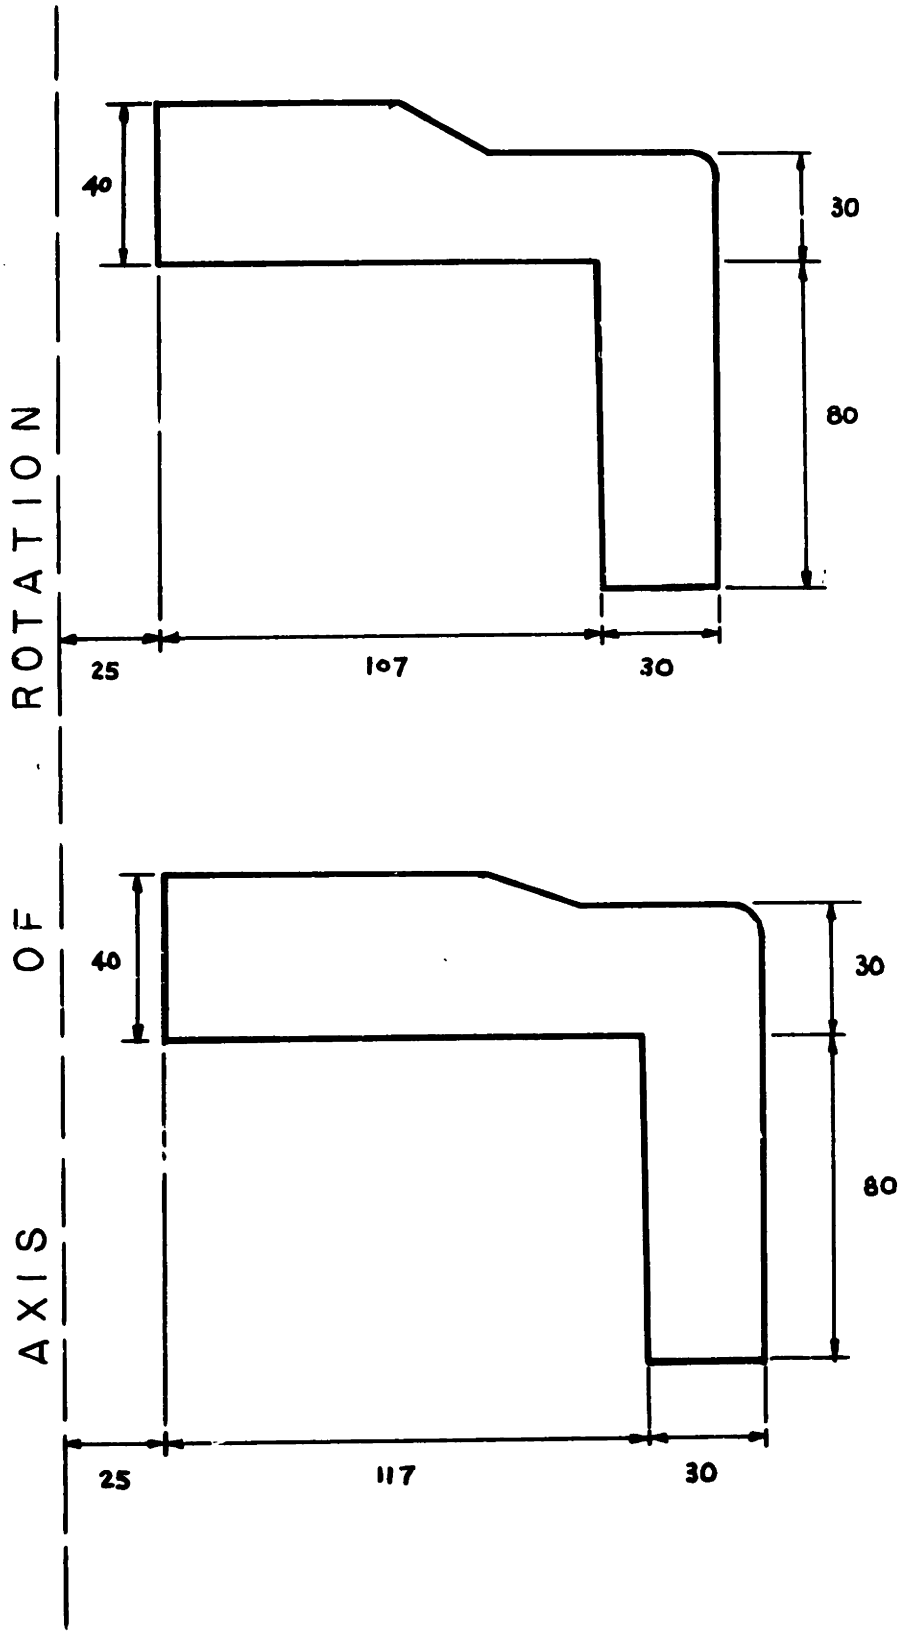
(a) Templates for rotor-blade-mount manufacturing
